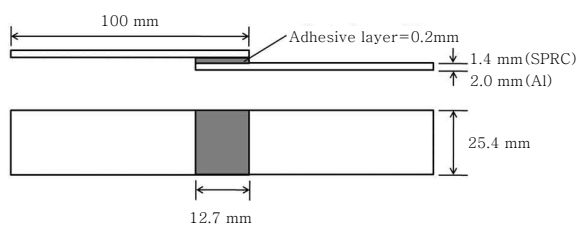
Dimension of single-lap joint test coupon of SPRC440 and Al 5052
